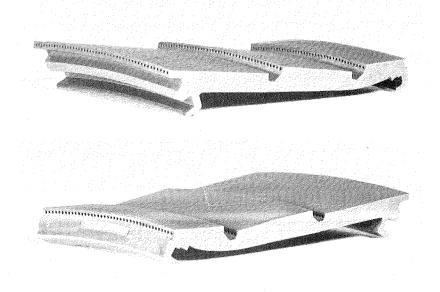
Liner Segment with Electro-Chemical Machined Cooling Holes (Segment total machining not complete)
